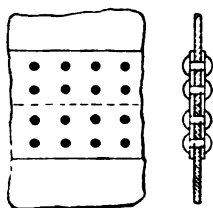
Double-riveted butt-joint, with double cover-plates.
